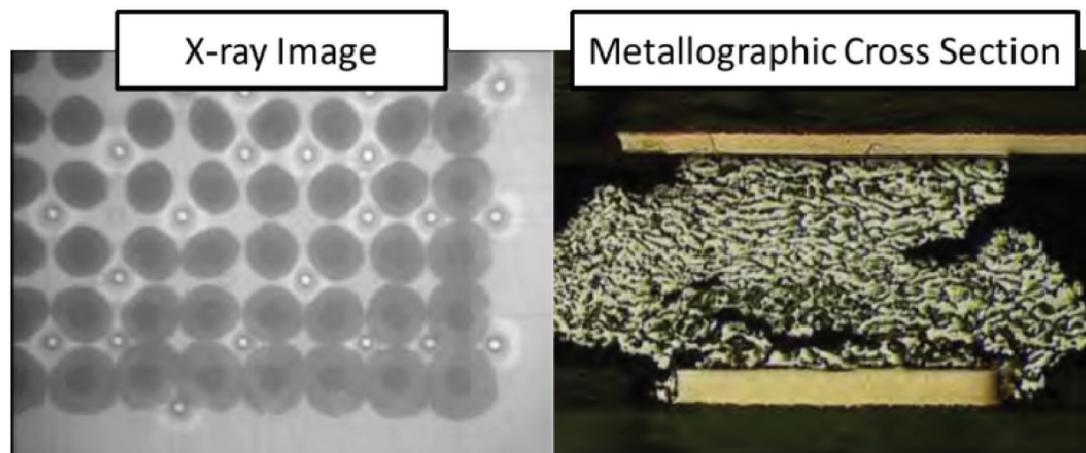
Top and side views of BGA solder joints with improper conformal coating after thermal cycling [1].
